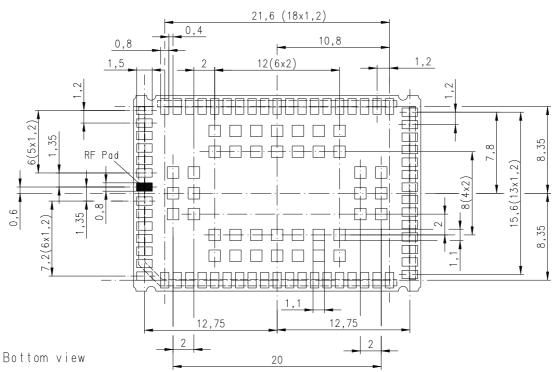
Dimensions of BGS2-E/BGS2-W (all dimensions in mm)
